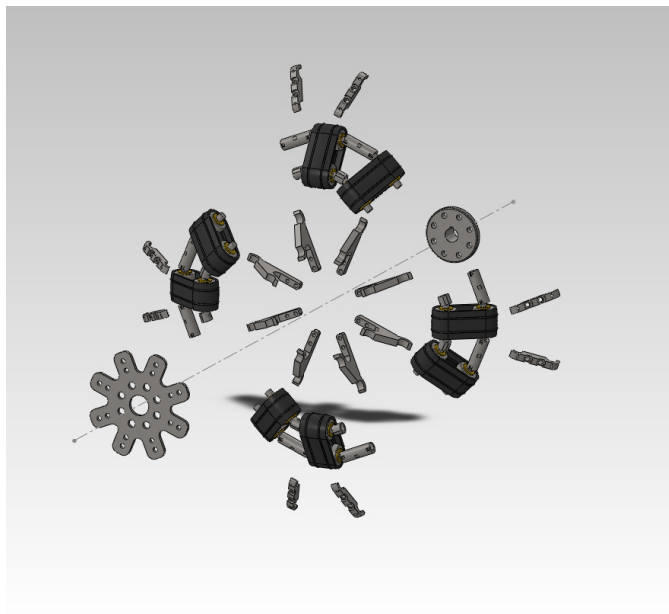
Exploded view of the outer layer of the wheel concept, with plastic panels removed.
